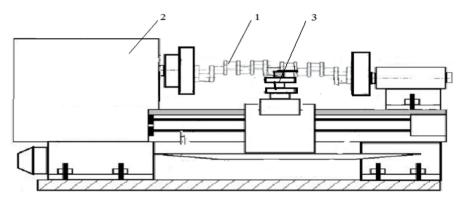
The layout of the crankshaft journals on a screw-cutting lathe. 1 - crankshaft journals, 2 - screw-cutting lathe, 3 - machine tool holder 2.
